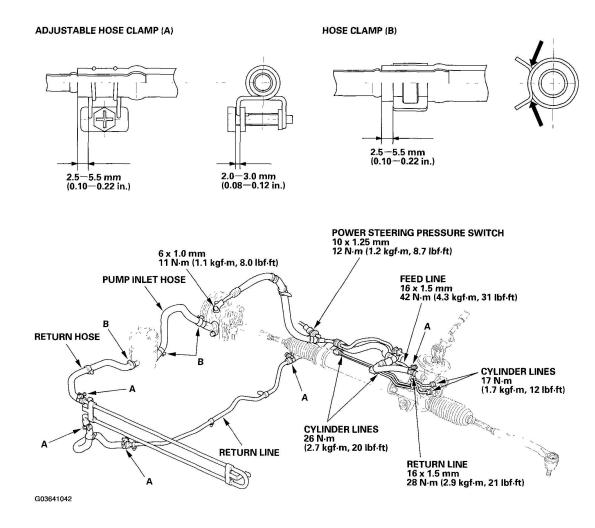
Identifying Adjustable Clamp Specified Distance From Hose End Courtesy of AMERICAN HONDA MOTOR CO., INC.
